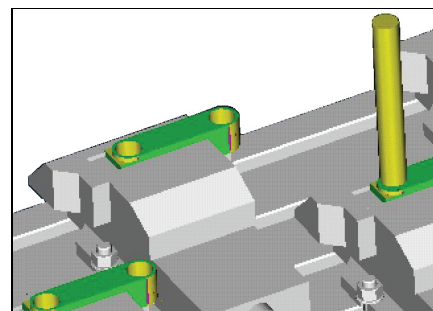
NC Check – simulation in CAD/CAM system Pro/Engineer.
